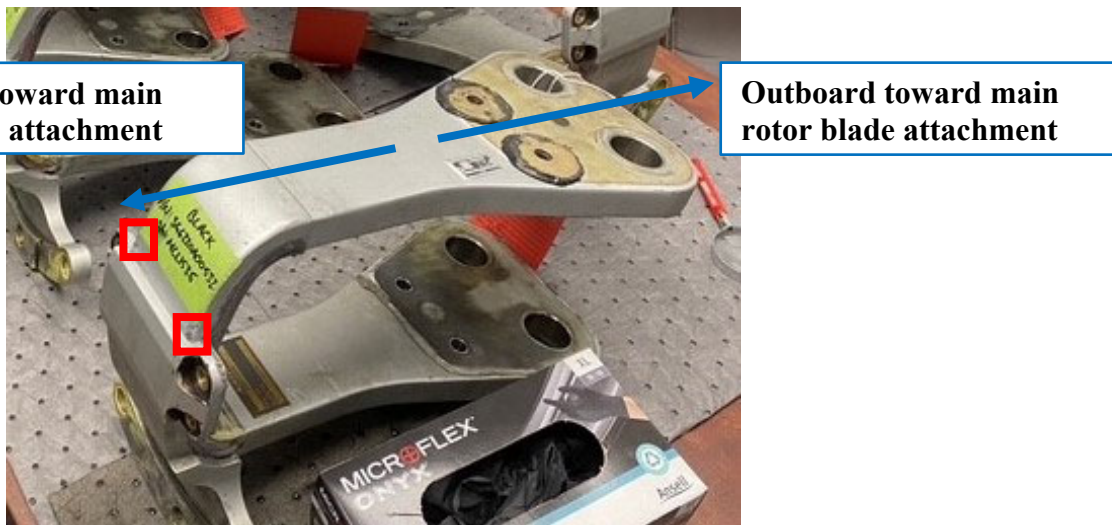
Leonardo AW139, Cracked Main Rotor Tension Link
